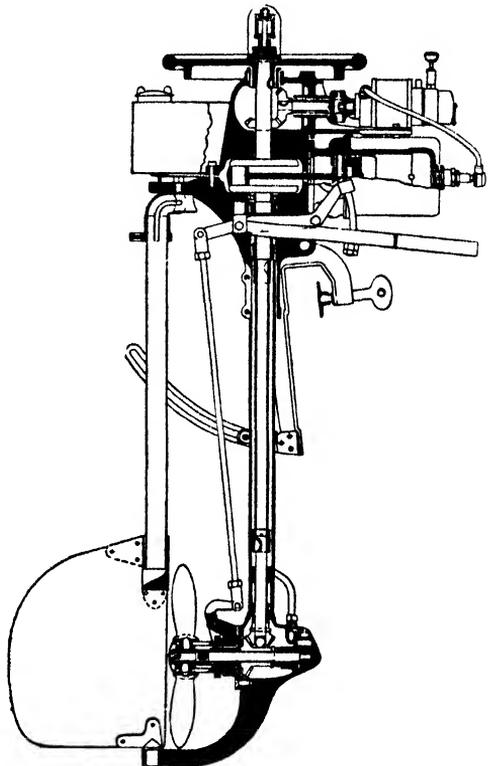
Sectional General Arrangement, with Reversing Propeller Gear
